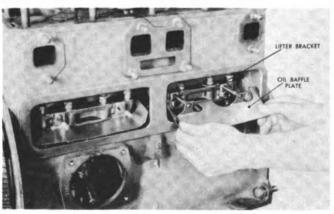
Installing Valve Chamber Baffle Plate and Cover.
